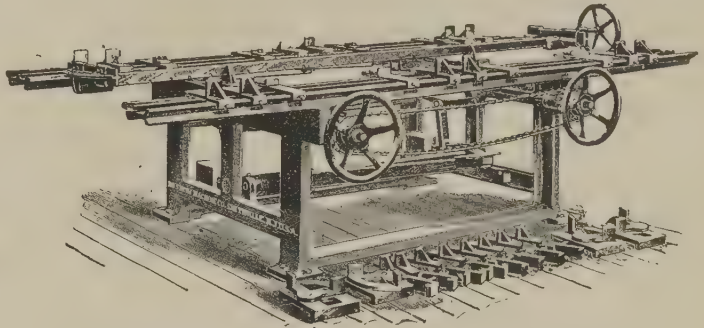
DOOR AND CABINET CLAMPING MACHINE.
